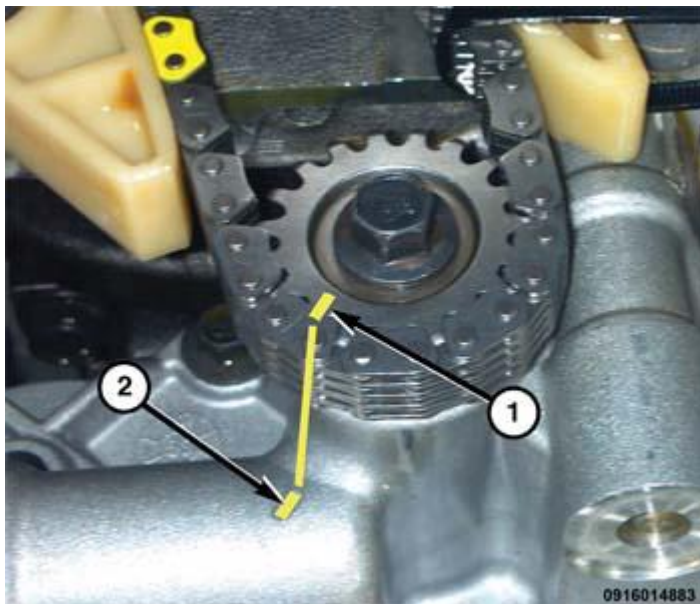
Oil Pump Chain And Sprocket To Module Body Marks
